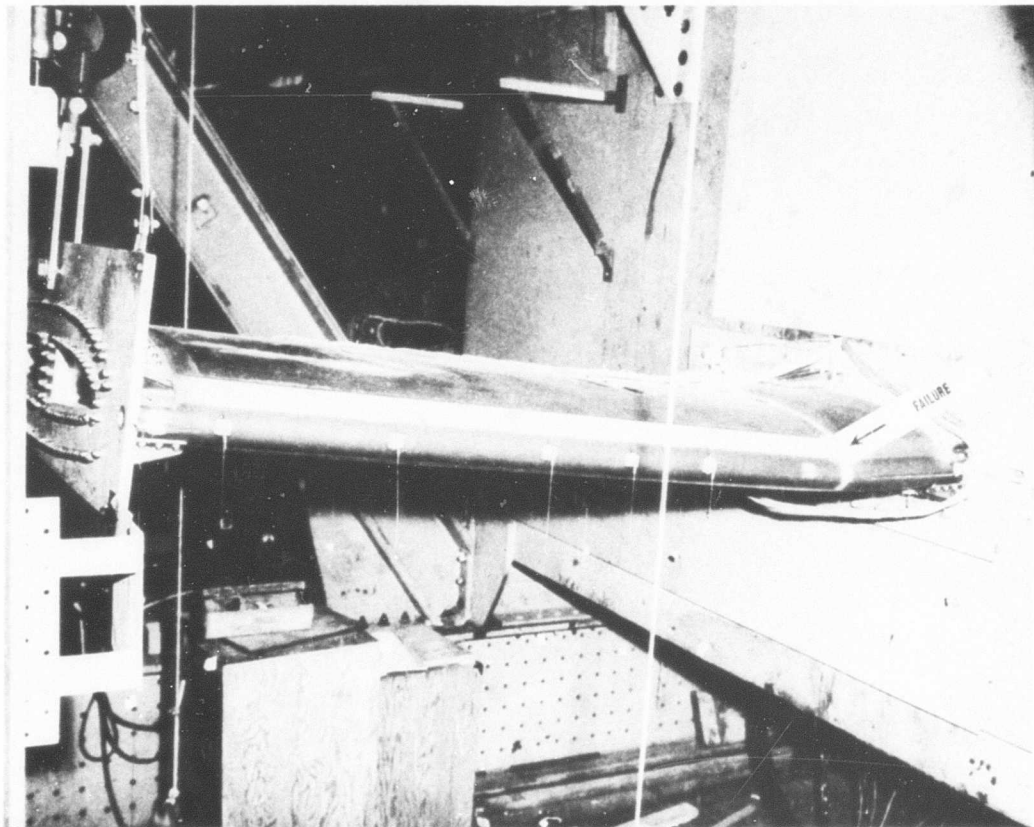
No. 1 FRP Wing Section - Overall View of the Failed Wing Section.
